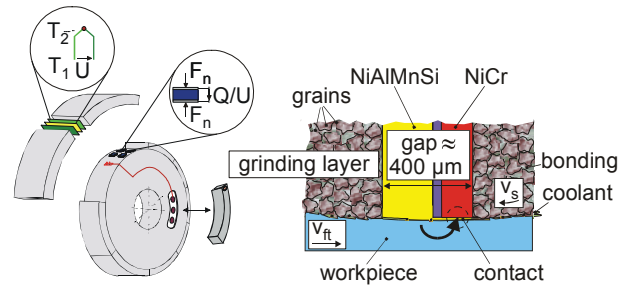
Integration of a thin film thermocouple and force sensors in the grinding wheel.
